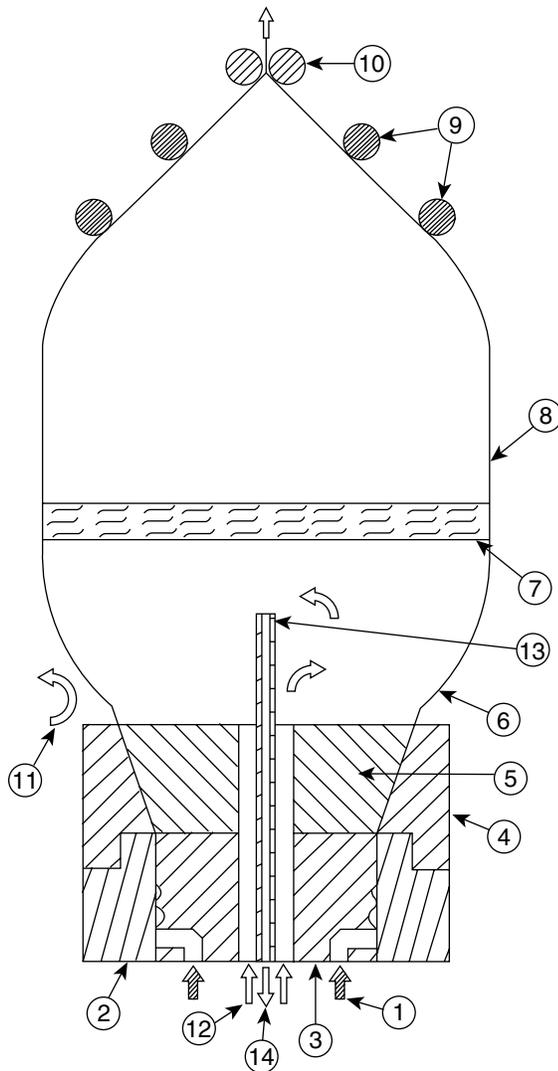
Schematic of spiral mandrel blown film die operation: (1) ring-shaped melt distribution; (2) die body; (3) spiral flow mandrel; (4) sizing ring; (5) spreader; (6) film bubble; (7) frost line; (8) solidified film; (9) bubble collapsing rollers; (10) nip rollers; (11) external bubble cooling air; (12) internal bubble cooling air inlet; (13) internal bubble cooling pipe; and (14) heated internal bubble air return.
